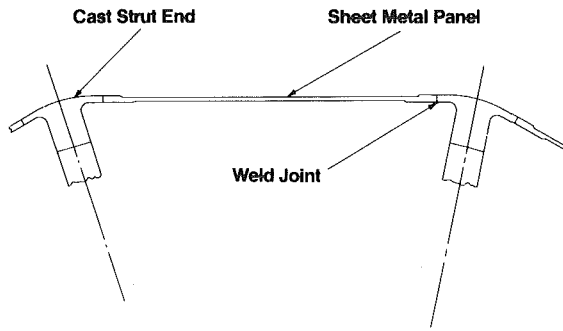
Casing panel chem milled to reduce stock thickness between strut ends
